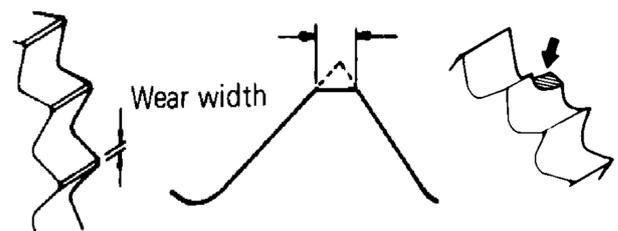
The maximum wear width as shown above should not exceed the dimensions shown in the table below.
